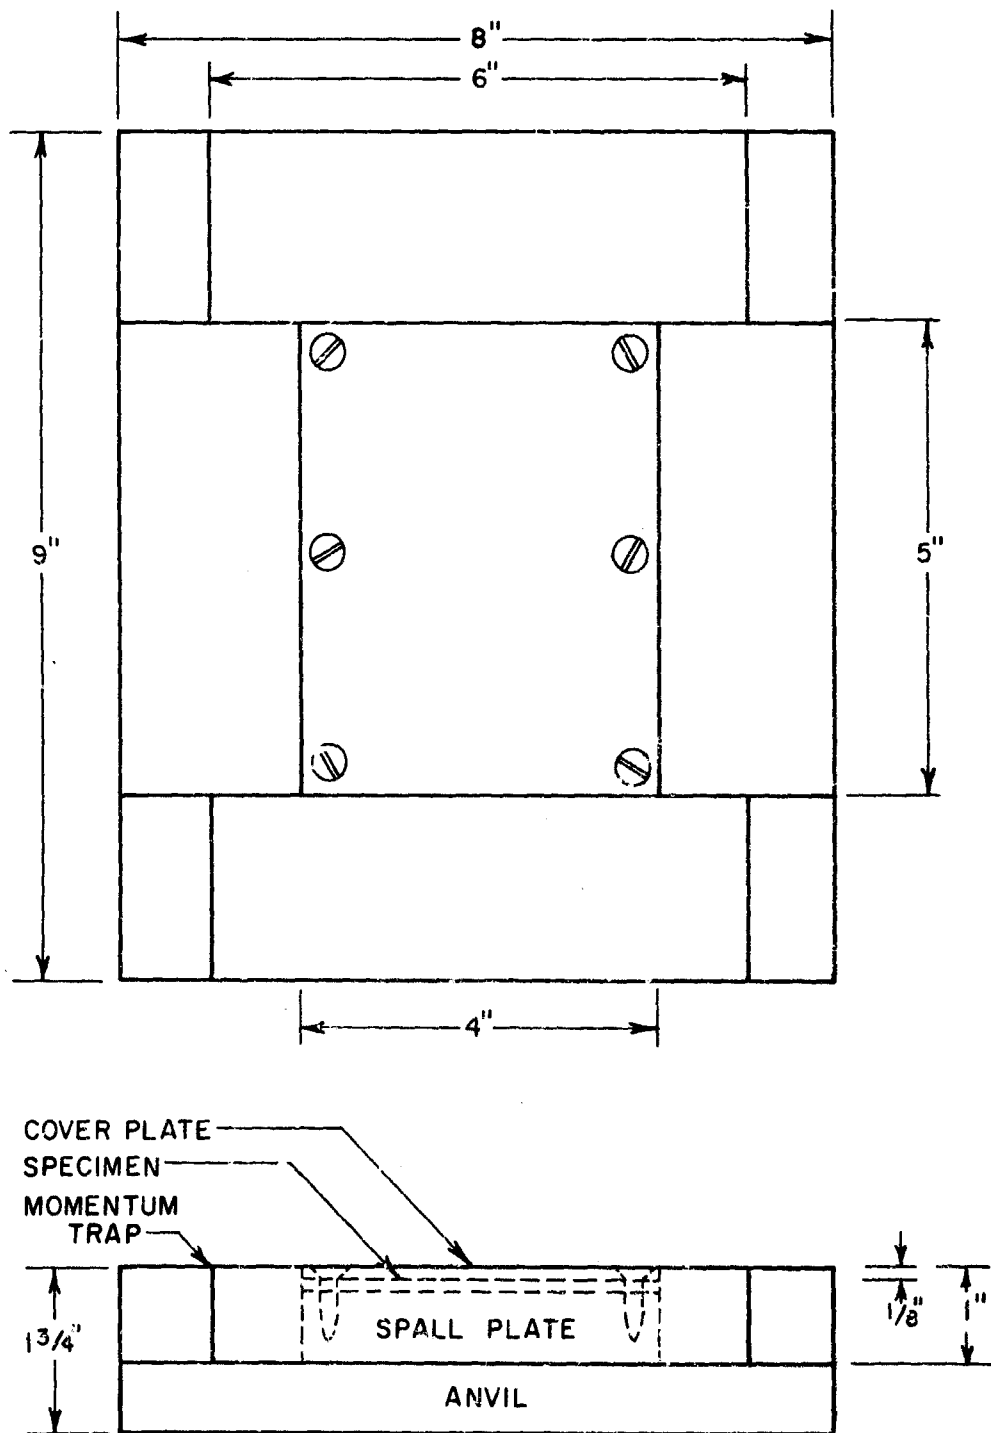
Specimen Assembly: Rectangular Plate Geometry
